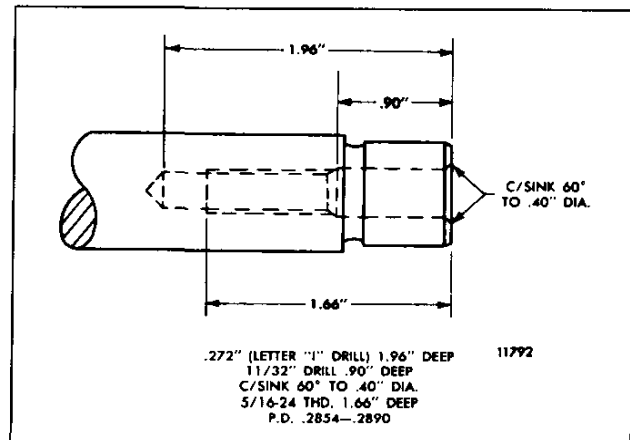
Dimensions for Reworking 6V Blower Rotor Shafts
